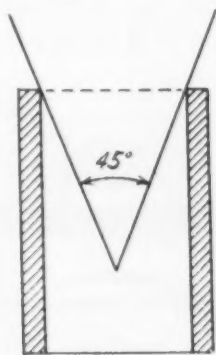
Sketch showing the principle of the spreading or expanding tests of tubes.
